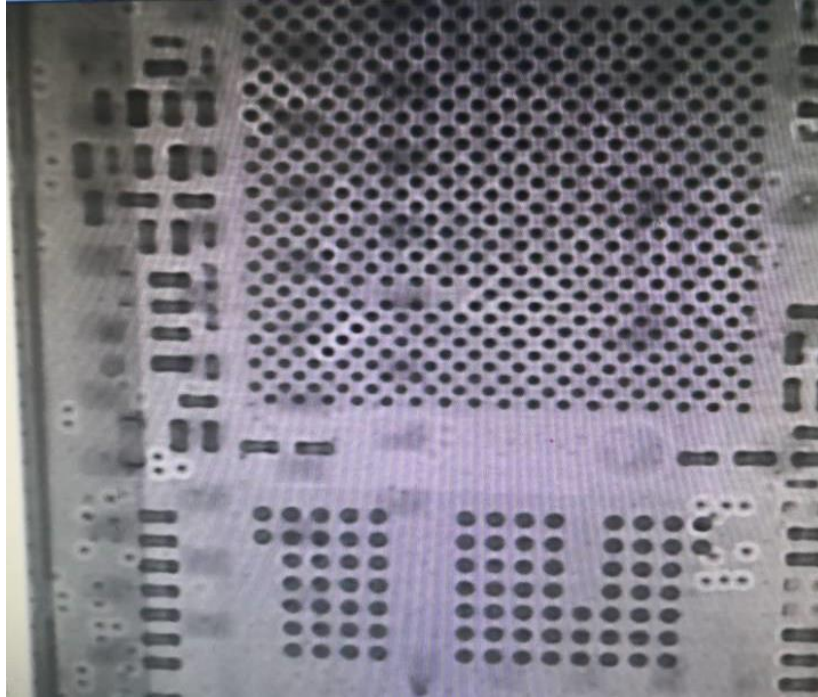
Quality Inspection for LGA Pins or BGA Components
